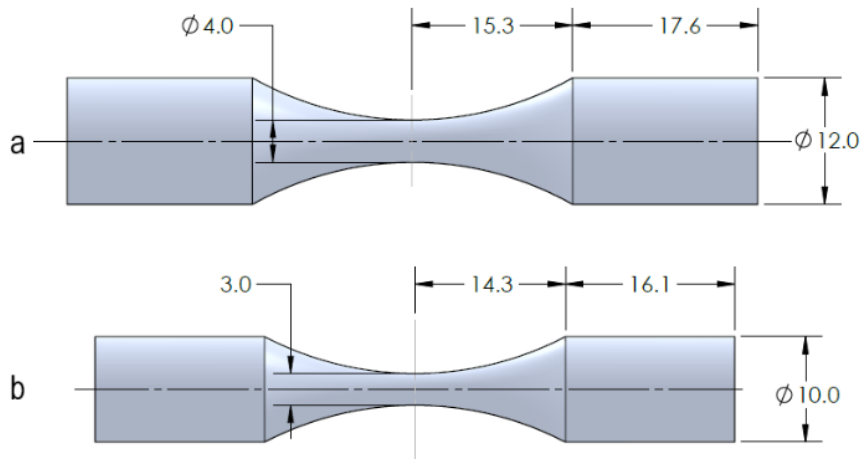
Geometry and Dimensions of (a) the Large Specimens and (b) the Baseline/Rough Specimens for Ultrasonic Fatigue Testing.
